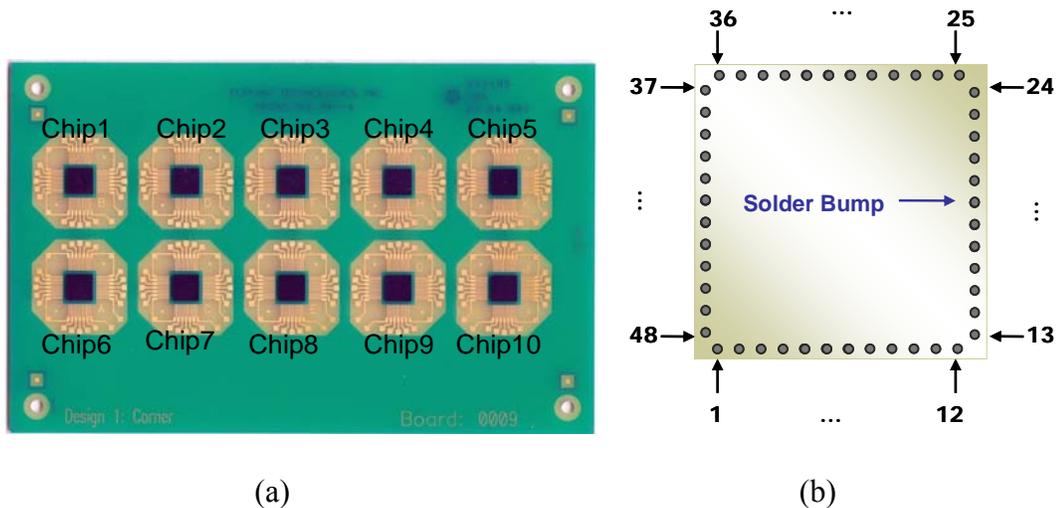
(a) Board layout of PB18 flip chip test vehicle (b) schematic of flip chip
